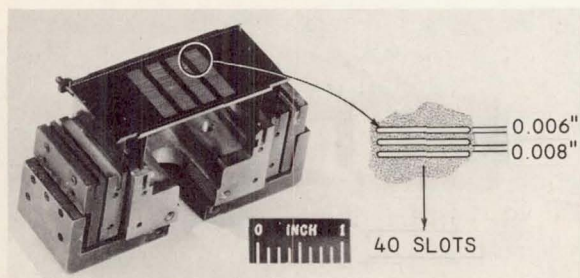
Tungsten grid. Electric-discharge machining.
